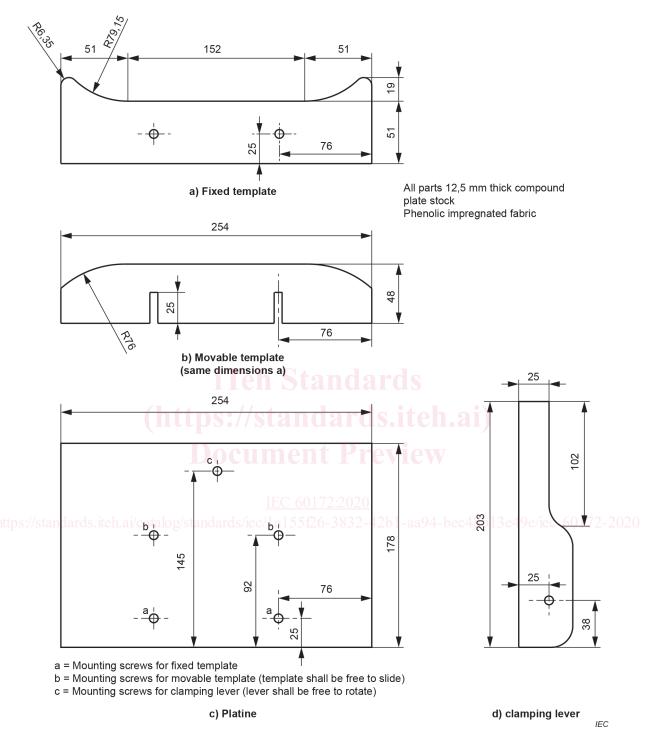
Jig for bending large magnet wire, dielectric test specimen
